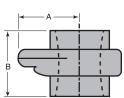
Butt Weld Schedule 160 and XXH Color Code: Green Subs/Black Nut
